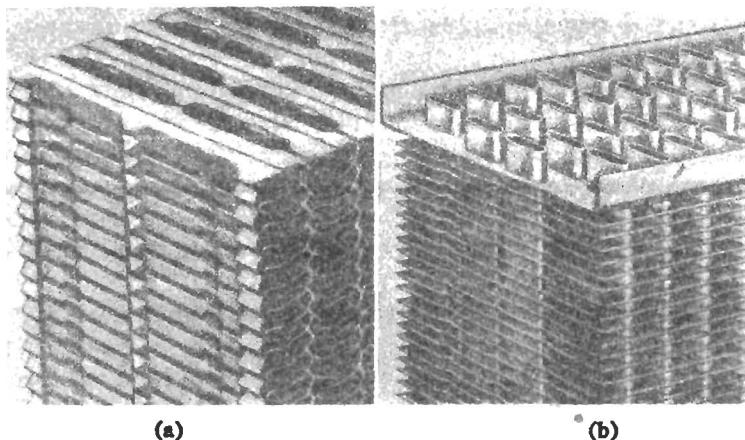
Radiator core construction; (a) cellular type and (b) tubular type with horizontal fins. (Courtesy McCord Corporation.)
